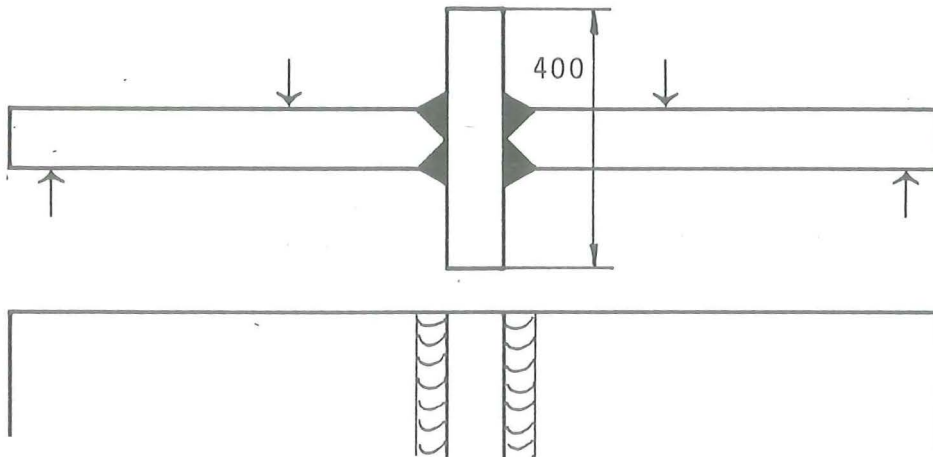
Geometry of 40 mm and 70 mm full penetration welds.
